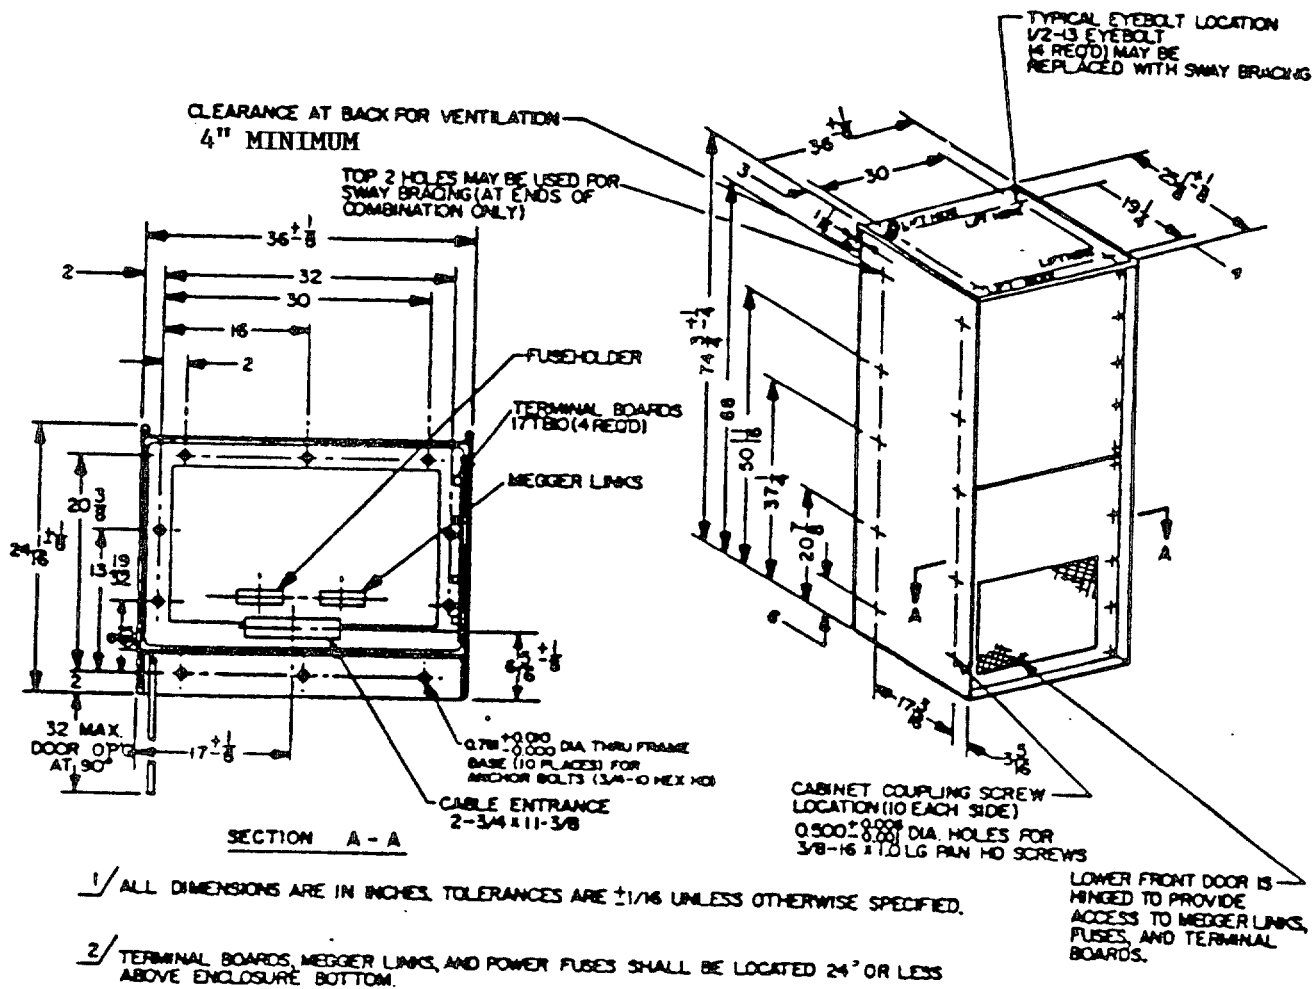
20, 26, 32 and 40 kW power supply, outline drawing.
